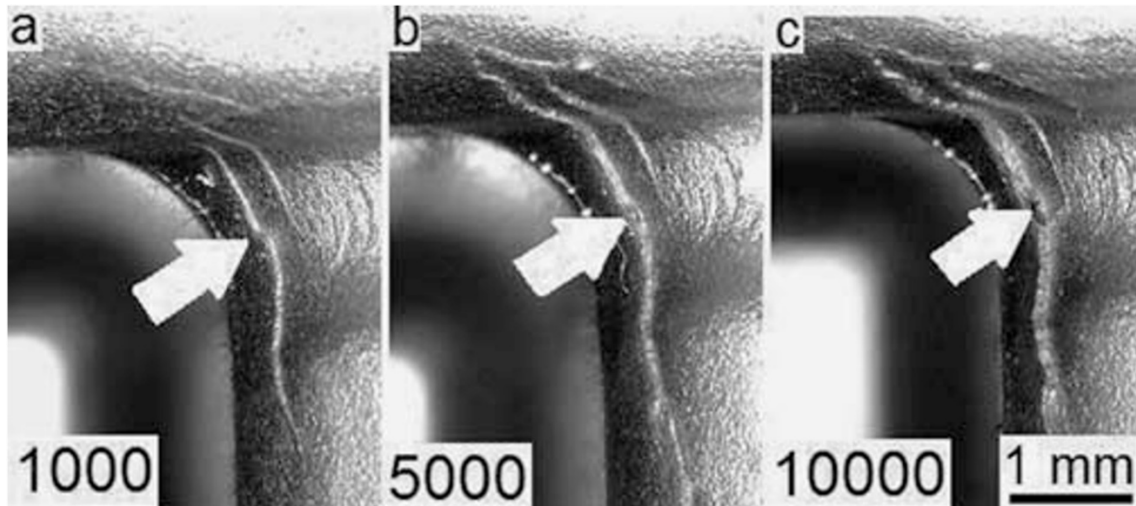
Casting failure due to thermal fatigue cracking in a die casting mould depending on the number of mould operating cycles
